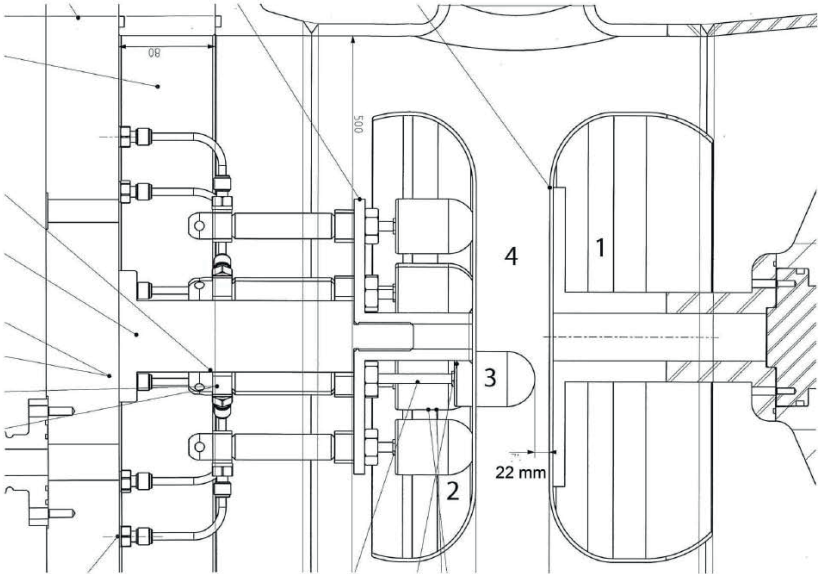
Rod-plane electrode arrangement with revolver assembly for the rod electrodes.
